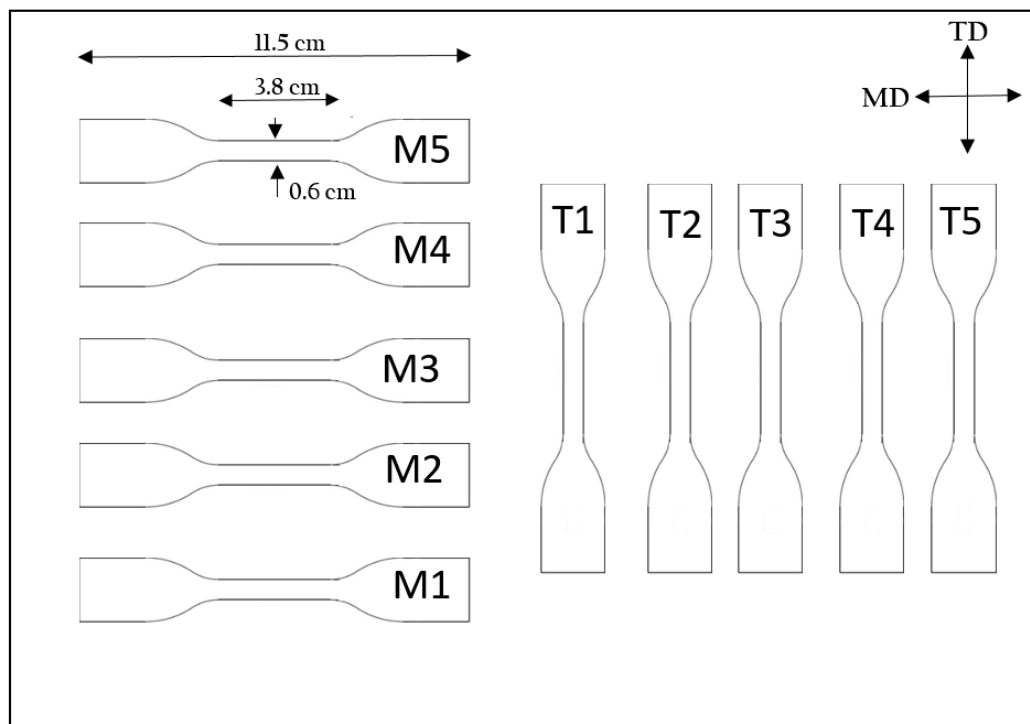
Dumbbell cutting layout for tensile testing with dimensions of dumbbells annotated. This cutting stencil allowed for 5 repeats in both Machine (MD) and Transverse (TD) Directions
